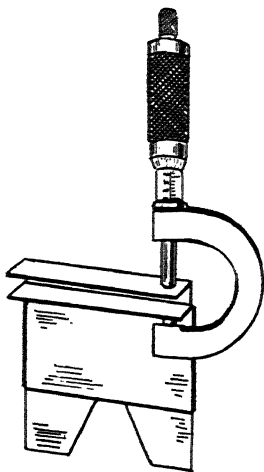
Modified gauge for checking flat against micrometer dimensions
